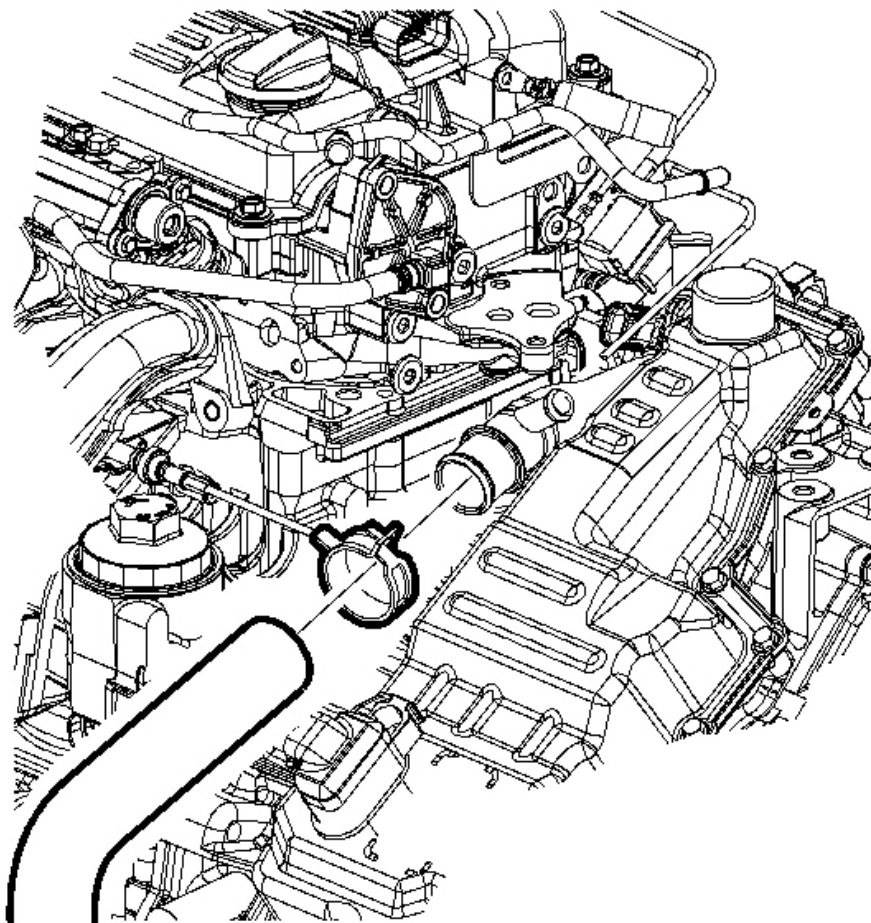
Disconnecting/Connecting Lower Radiator Hose
